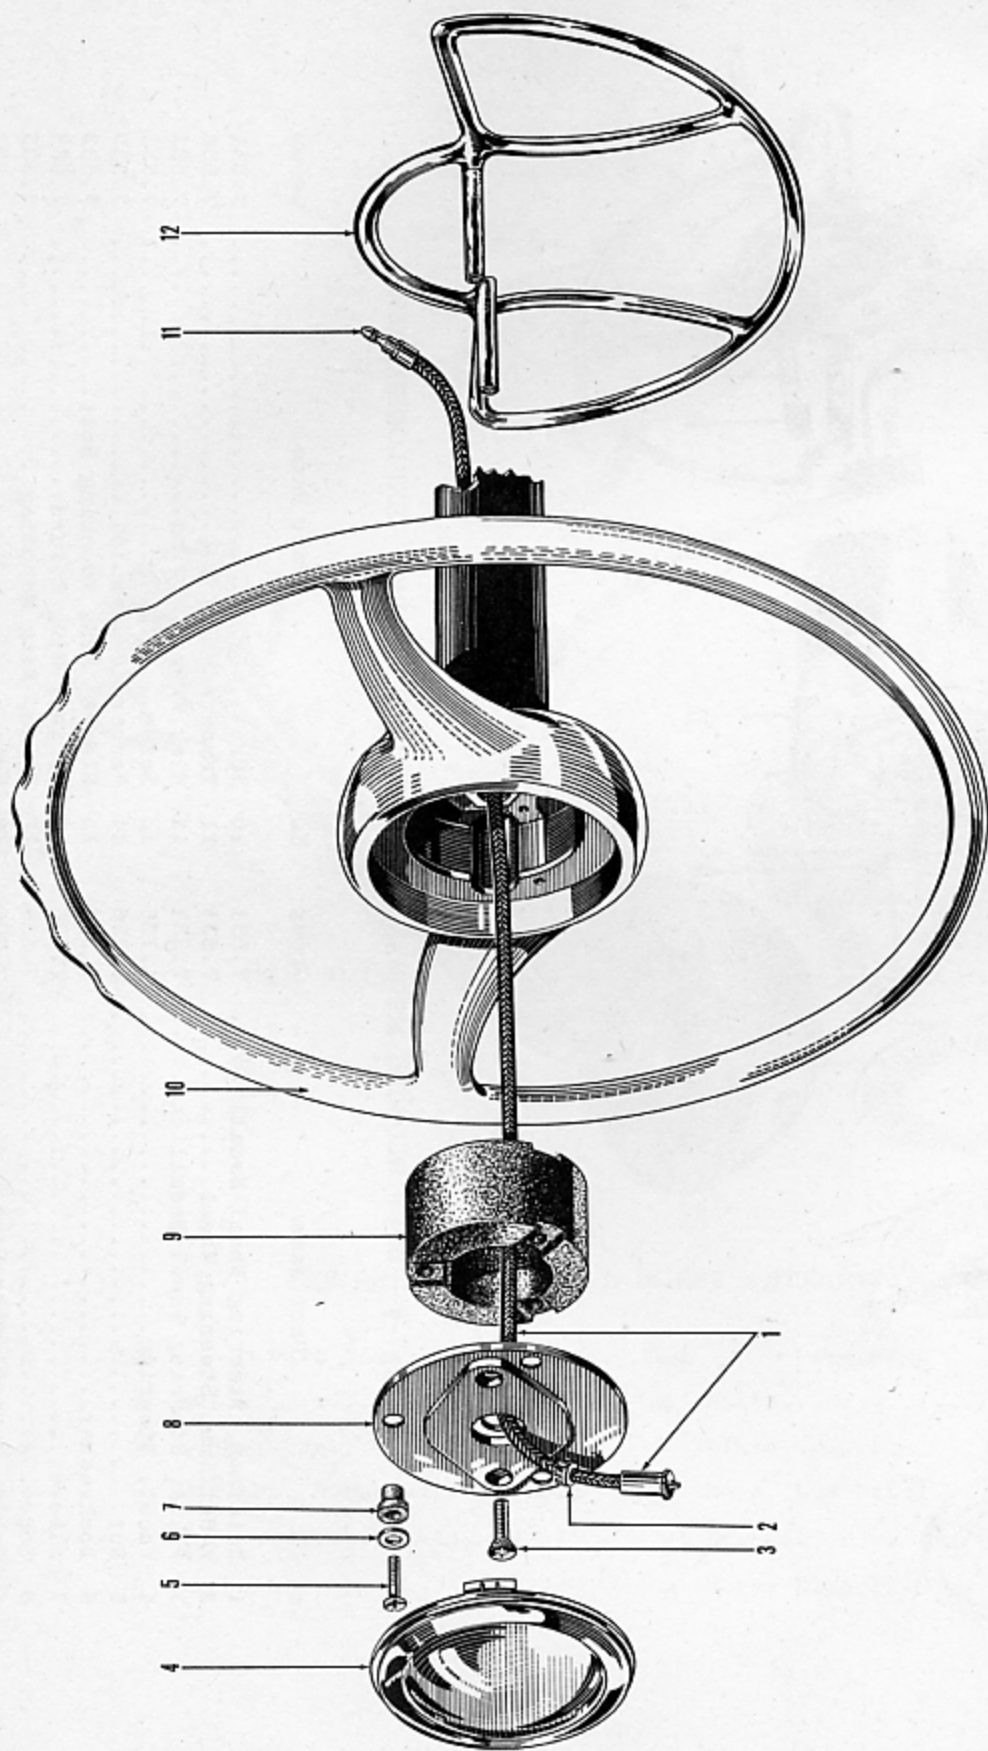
HORN BLOWING MECHANISM - ALL MODELS EXCEPT F-47C-F-486 - EXPLODED VIEW
